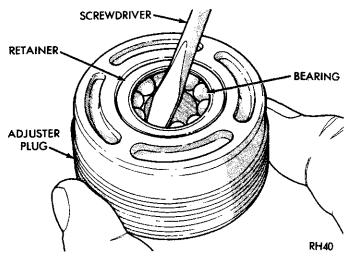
Wormshaft Lower Bearing Retainer Removal
